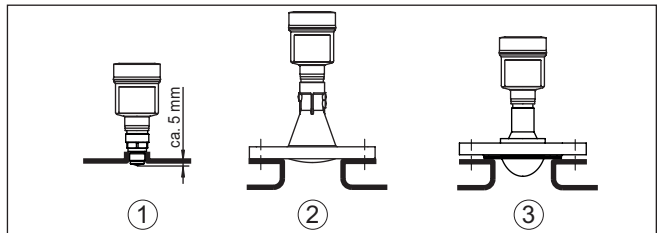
Recommended socket mounting with different versions of VEGAPULS 64
